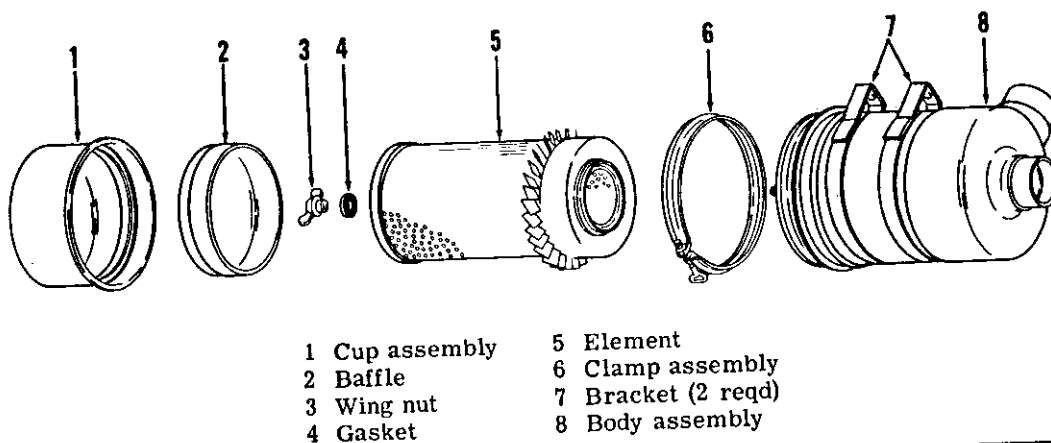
Compressor Air Cleaner and/or Engine Air Cleaner, Disassembly and Reassembly
